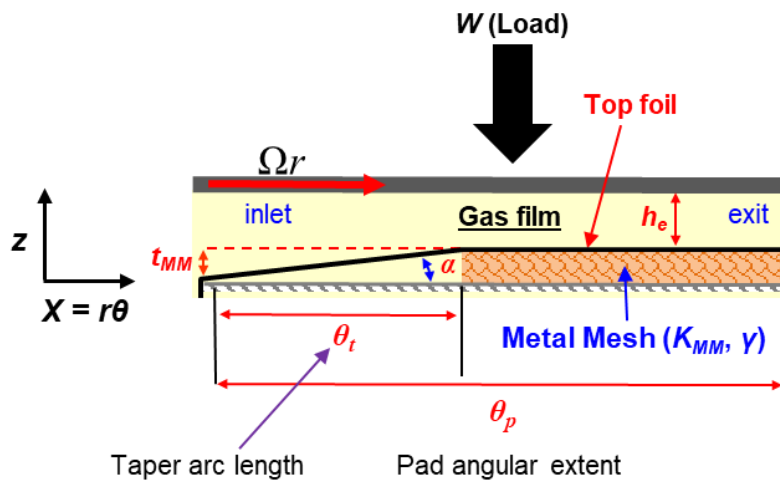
Schematic of a single pad tapered metal mesh foil thrust bearing.
